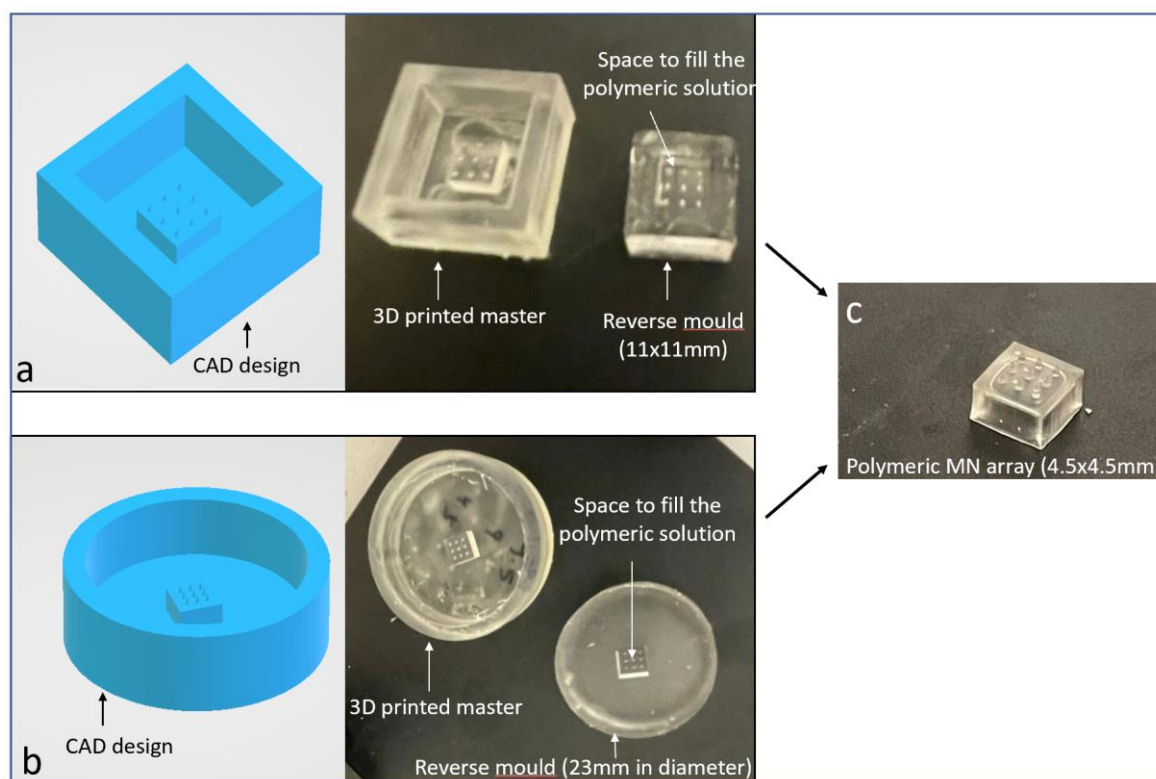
Preliminary master designs showing CAD design, 3D printed master, and PDMS reverse mould, (a) square mould, (b) circular mould, (c) polymeric MN array.
